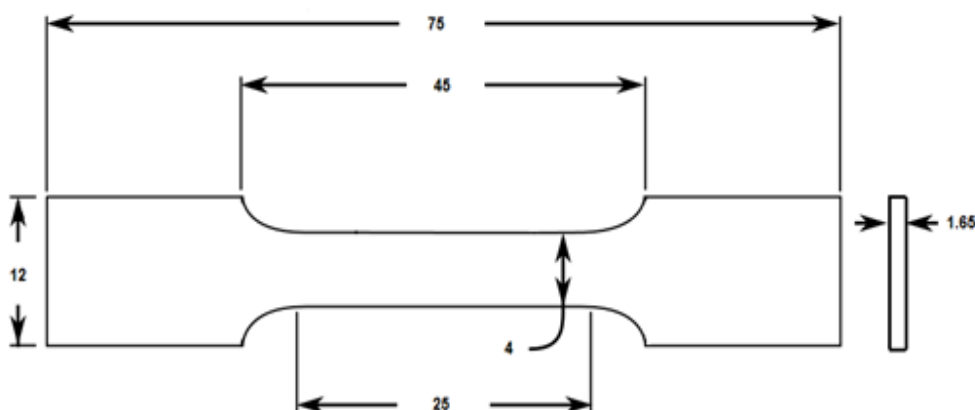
Tensile test sample dimensions (all dimensions in mm).
